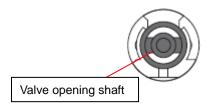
Air purge valve is opened (Valve opening shaft: horizontal)
